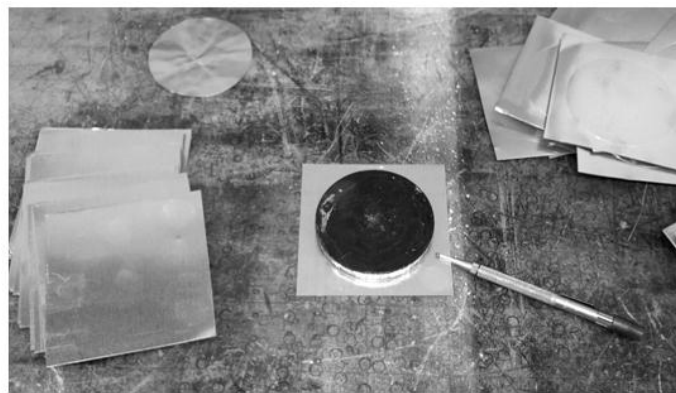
Scriber and reference piece used to draw the final shape of Al foils and plates.
